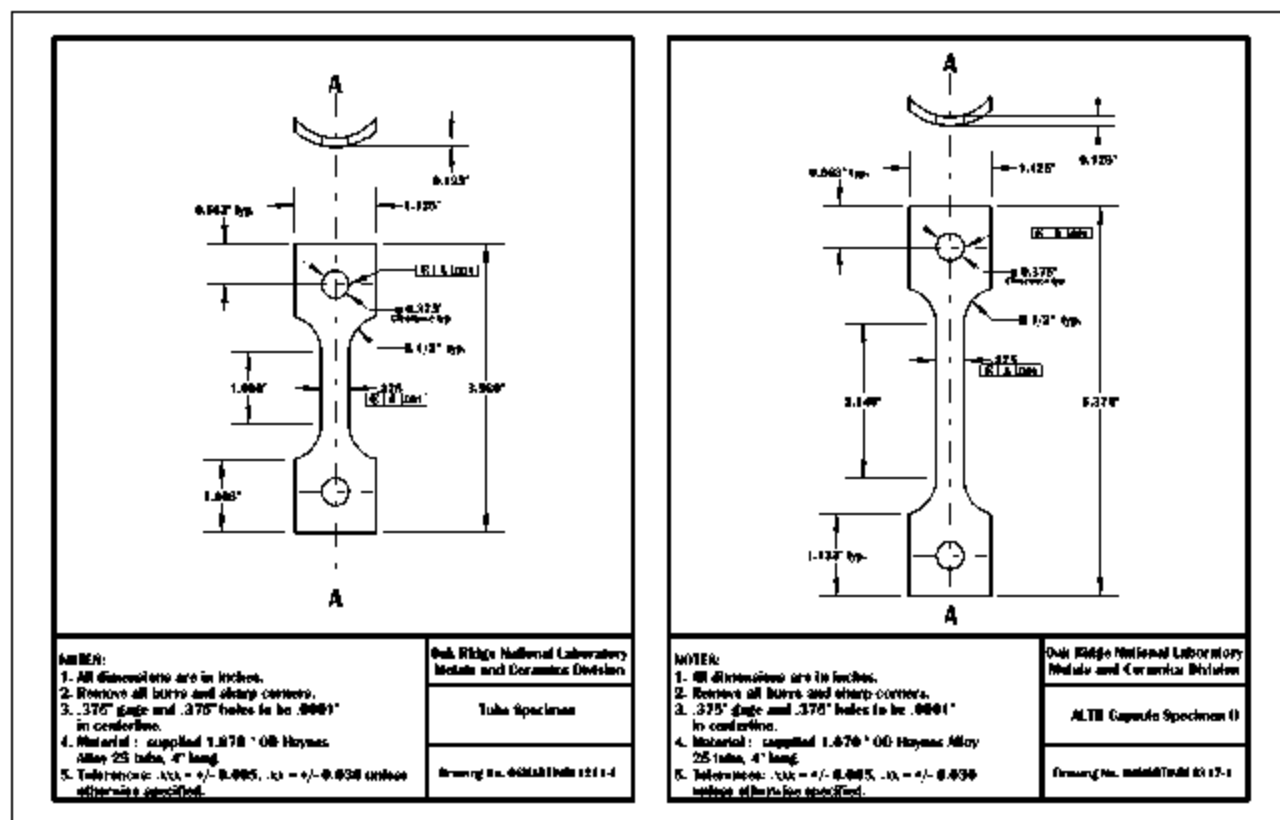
Uniaxial weldment specimens taken from tubular machined bar. Weldment crown was in center of gauge section similar to uniaxial plate specimens. The gauge length of some specimens was 1.000 in. (25.40 mm) as shown in the figure on the left, and other specimens were machined with a gauge length of 2.140 in. (54.35 mm) as shown on the right, depending on available material.
